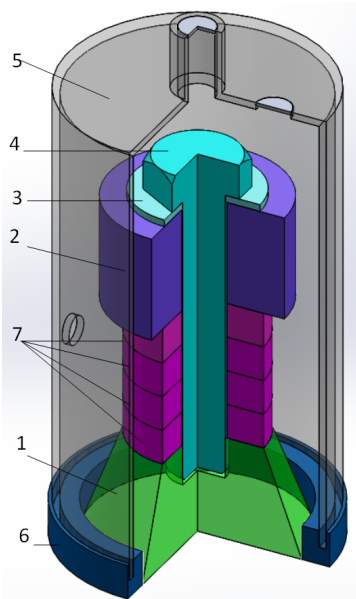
Model of a piezoceramic electroacoustic transducer of the Langevin type: 1 – emitting plate; 2 – back plate; 3 – washer; 4 – bolt; 5 – casing; 6 – fastening ring; 7 – active element
